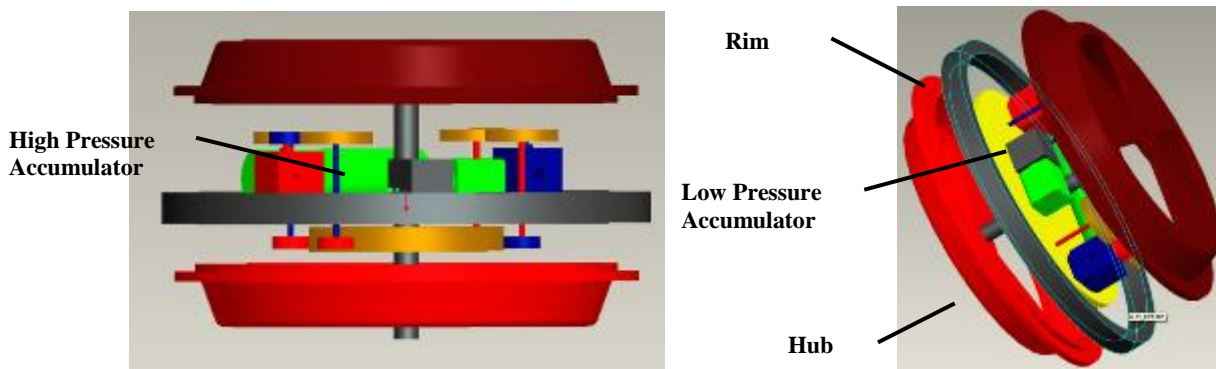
13: 3-Dimensional depictions of the assembled entire assembly, exploded side view
